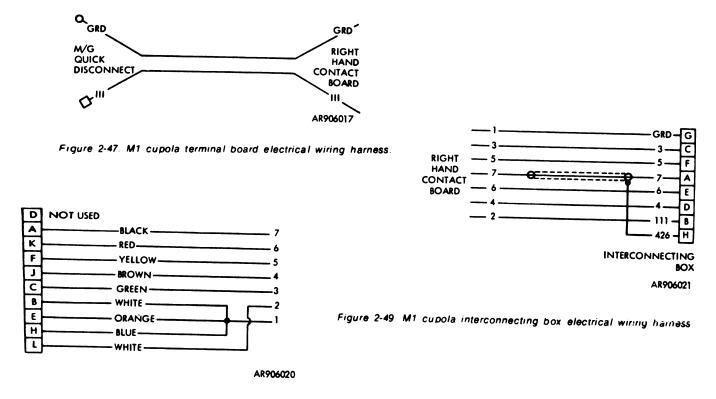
M1 cupola terminal board electrical wiring harness.
